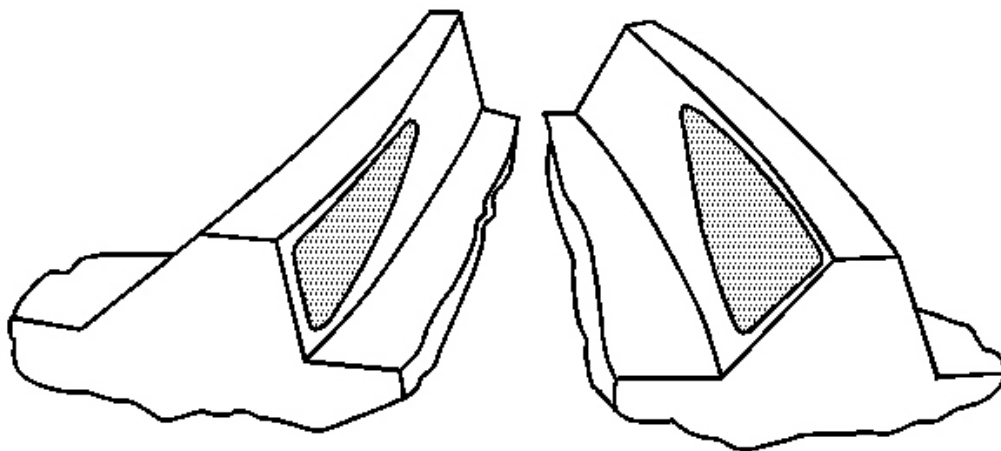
Identifying Drive Side Heel - Coast Side Heel Contact Pattern
